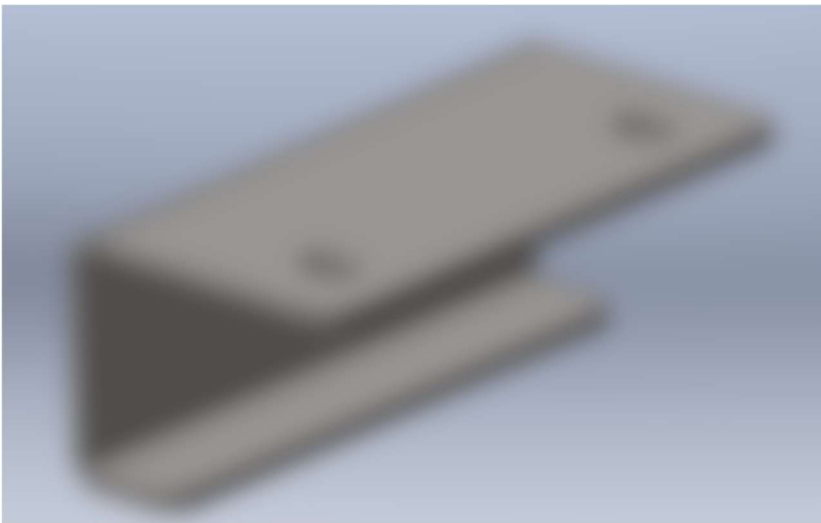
Shows a bent sheet metal part that has been created using the SolidWorks part module.
